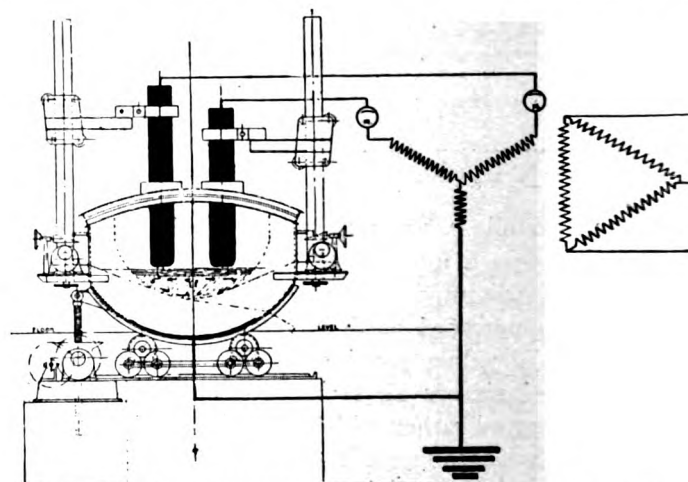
Section of furnace showing top and bottom electrodes and method of connecting.
